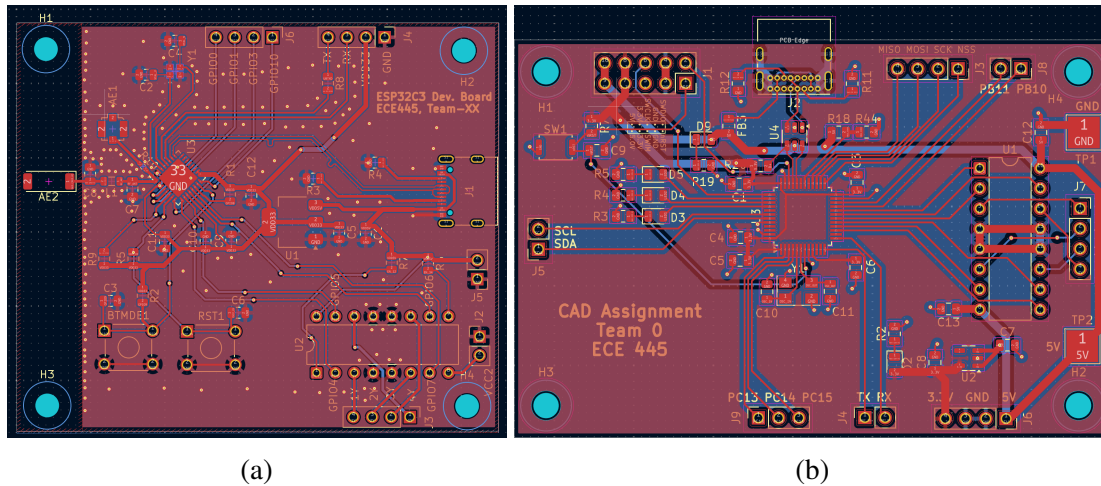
(a) ESP32 PCB layout (b) STM32 PCB layout
